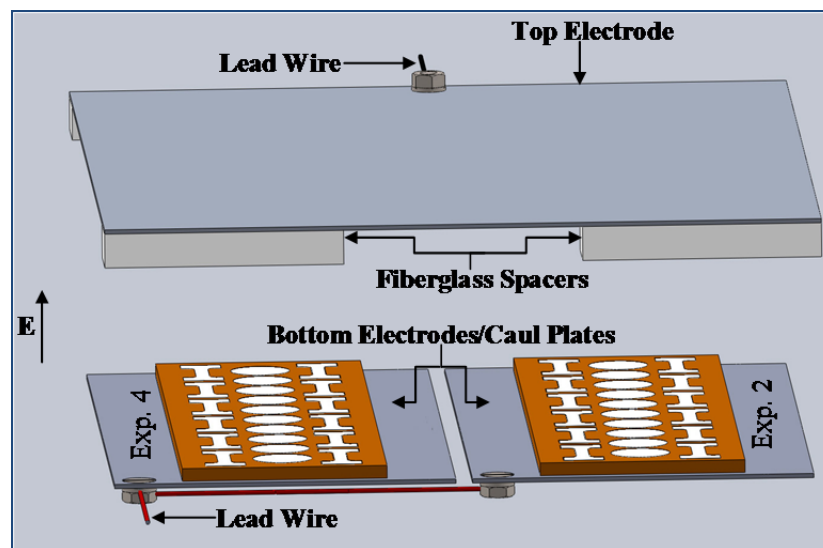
Exploded View of the Through-Plane DPA Set-up for Experiments 2 and 4
